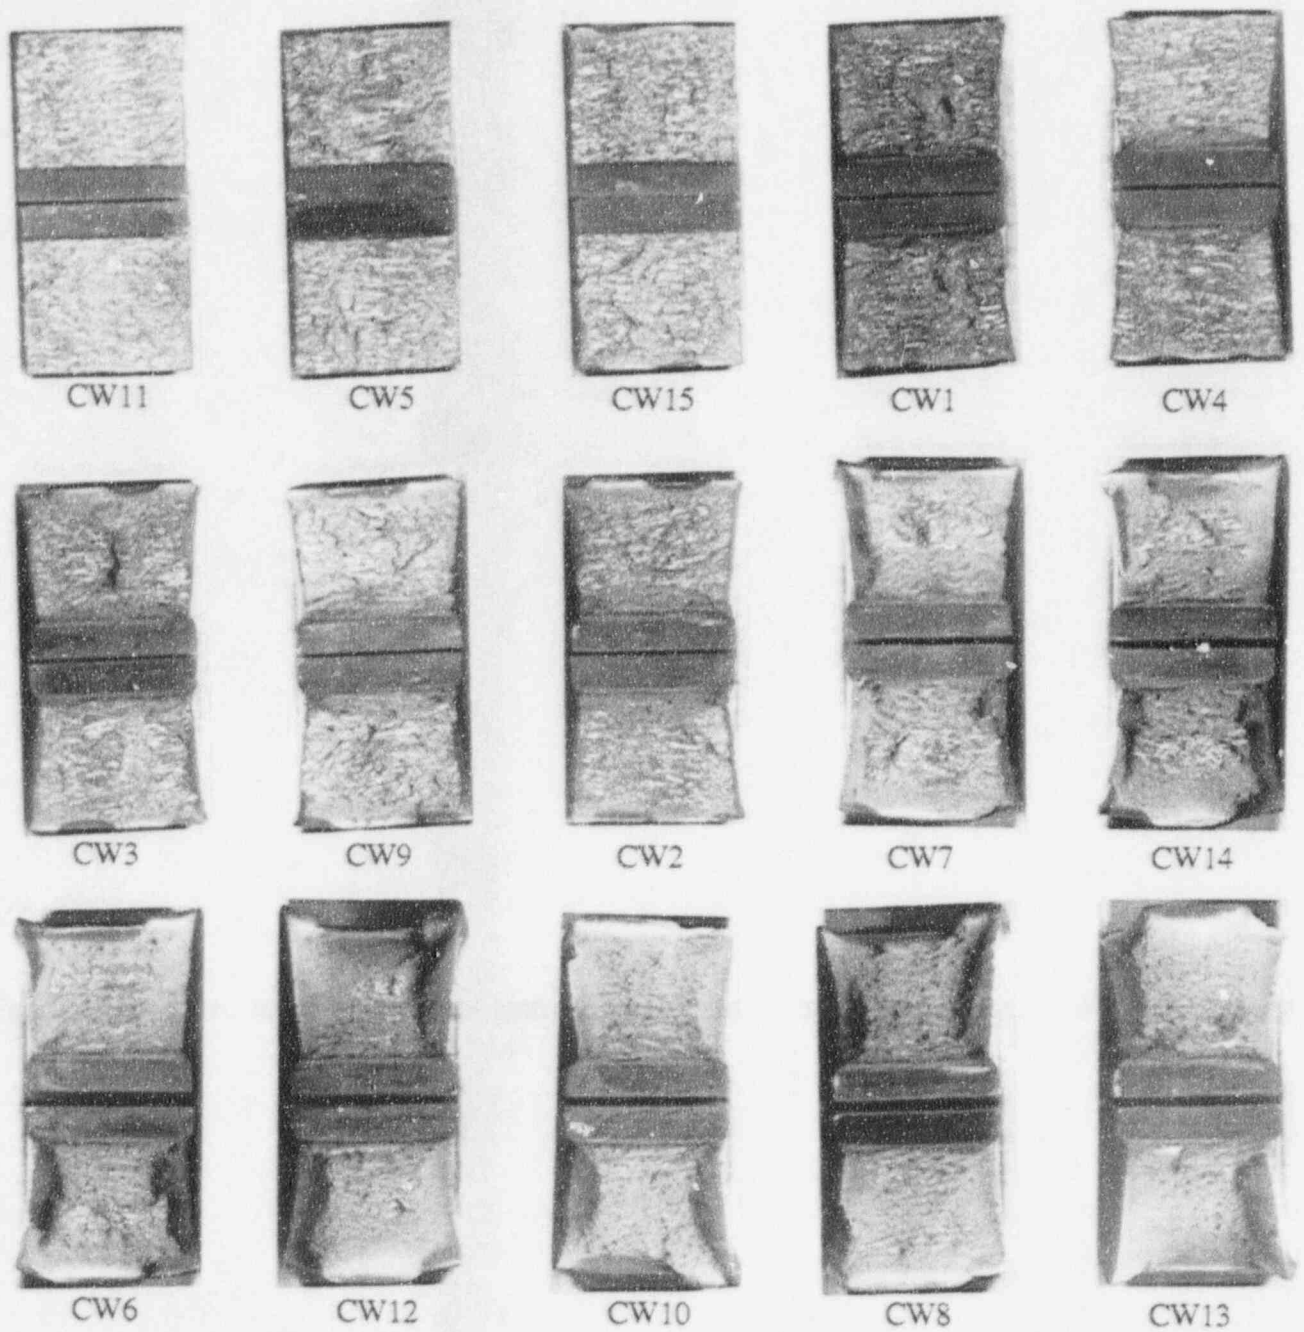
Charpy Impact Specimen Fracture Surfaces of the CPSES Unit No. 2 Reactor Vessel Weld Metal
